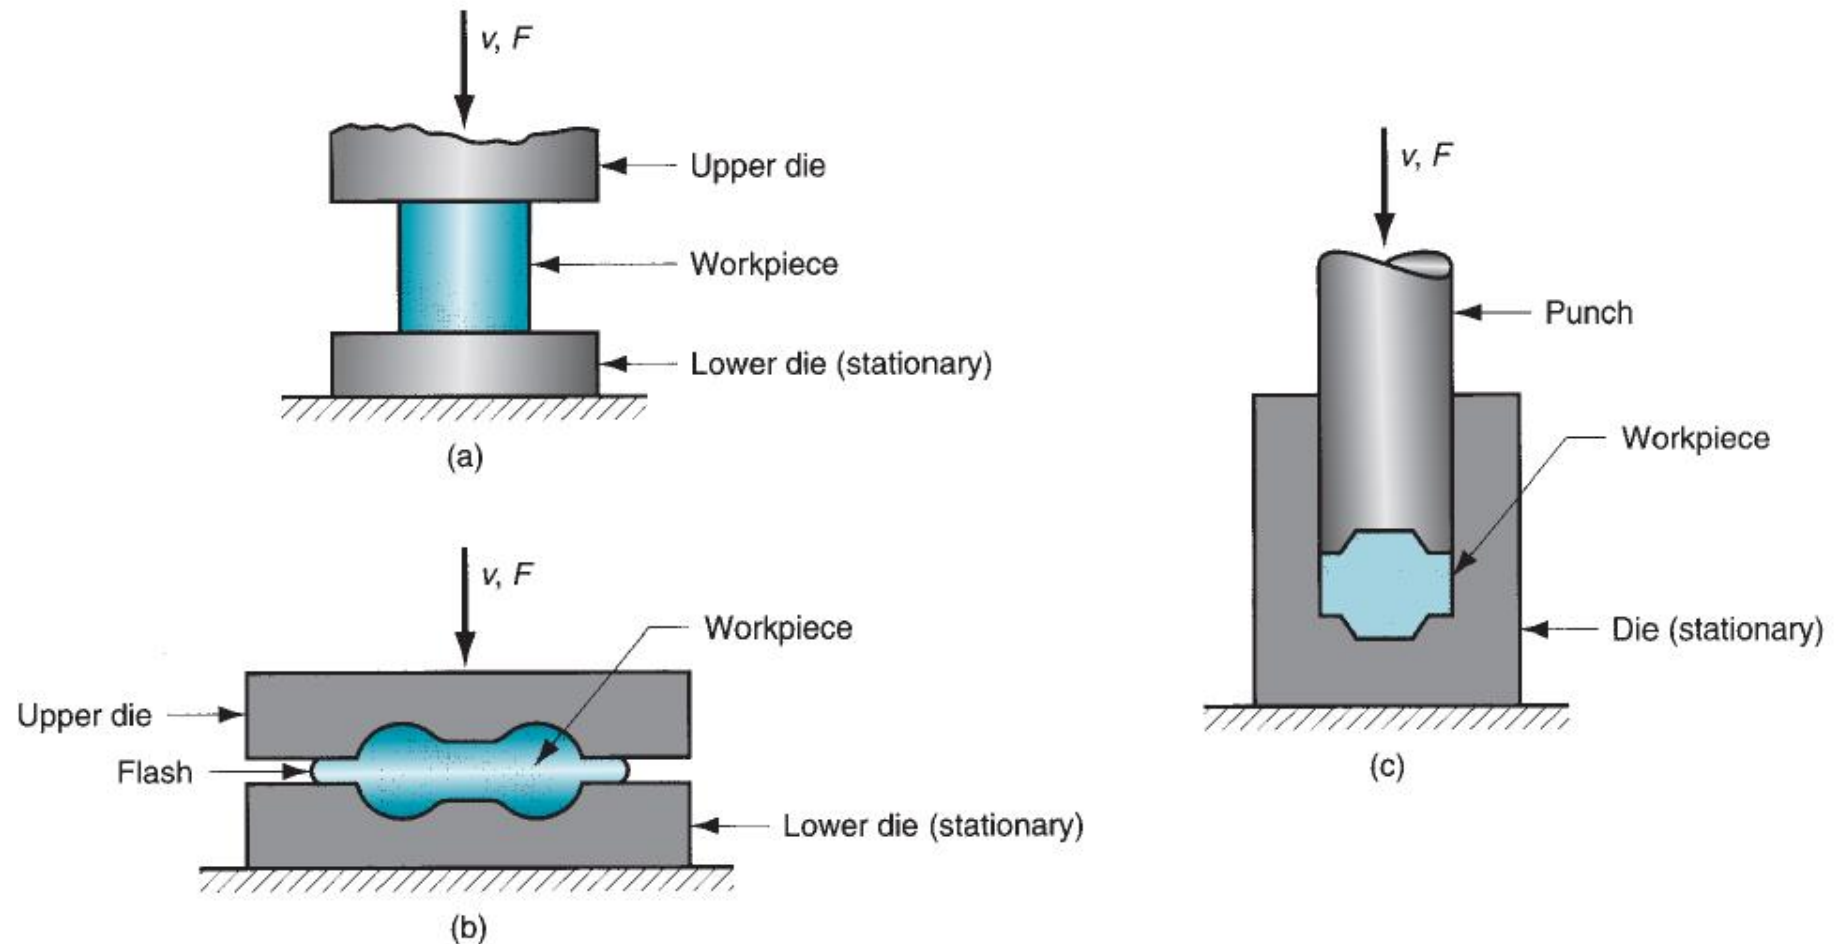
Three types of forging operation: (a) open-die forging, (b) impression-die forging, and (c) flashless forging.
